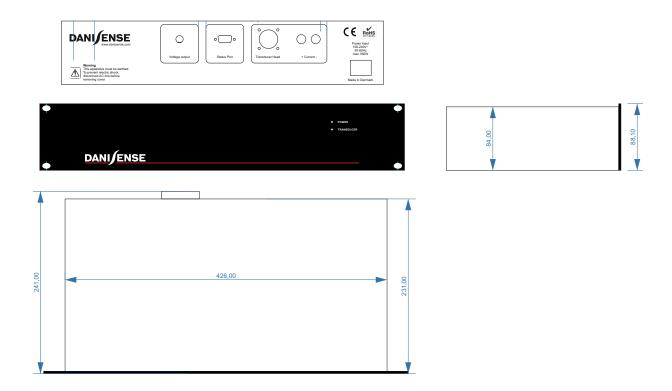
Dimensions of electronics control box. 0.3 mm general tolerance
